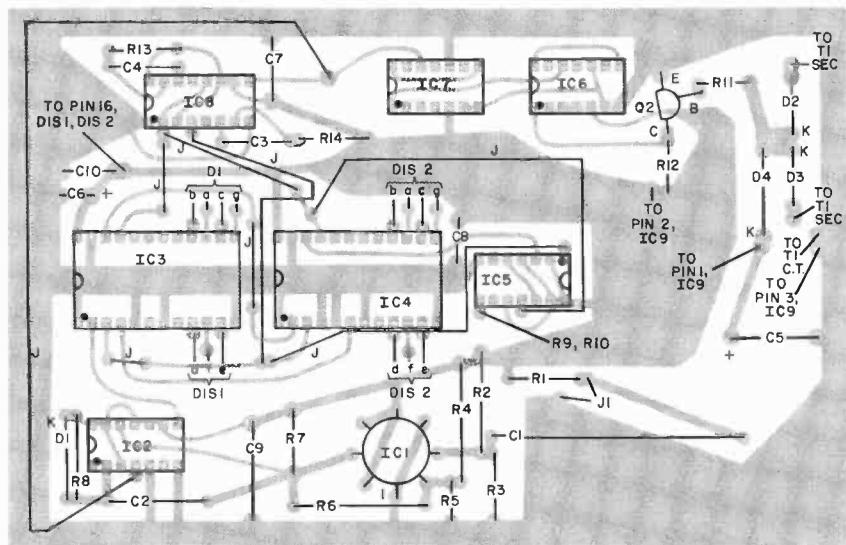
Full-size etching and drilling guide for pc board is shown above with parts placement guide at left.
